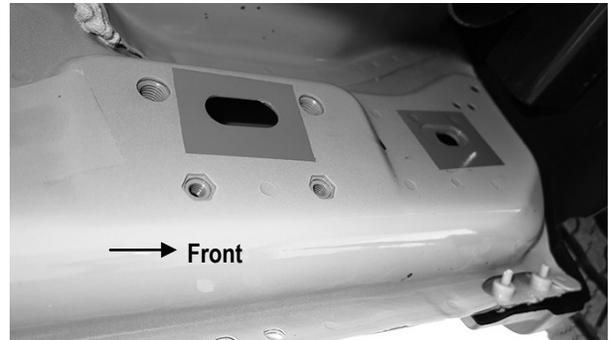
Thread Plastic Washer onto Bolt Plate to hold Bolt Plate in position
